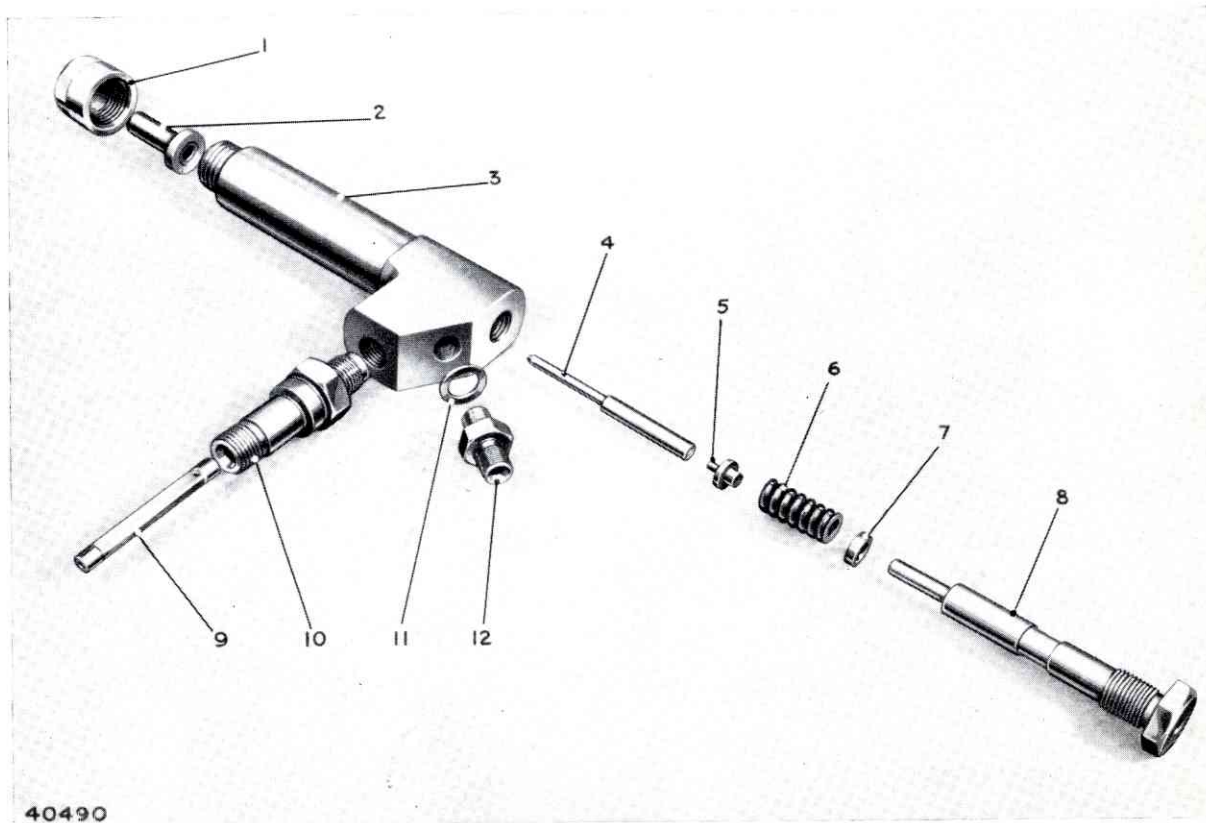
EXPLODED VIEW OF THE INJECTOR UNIT
